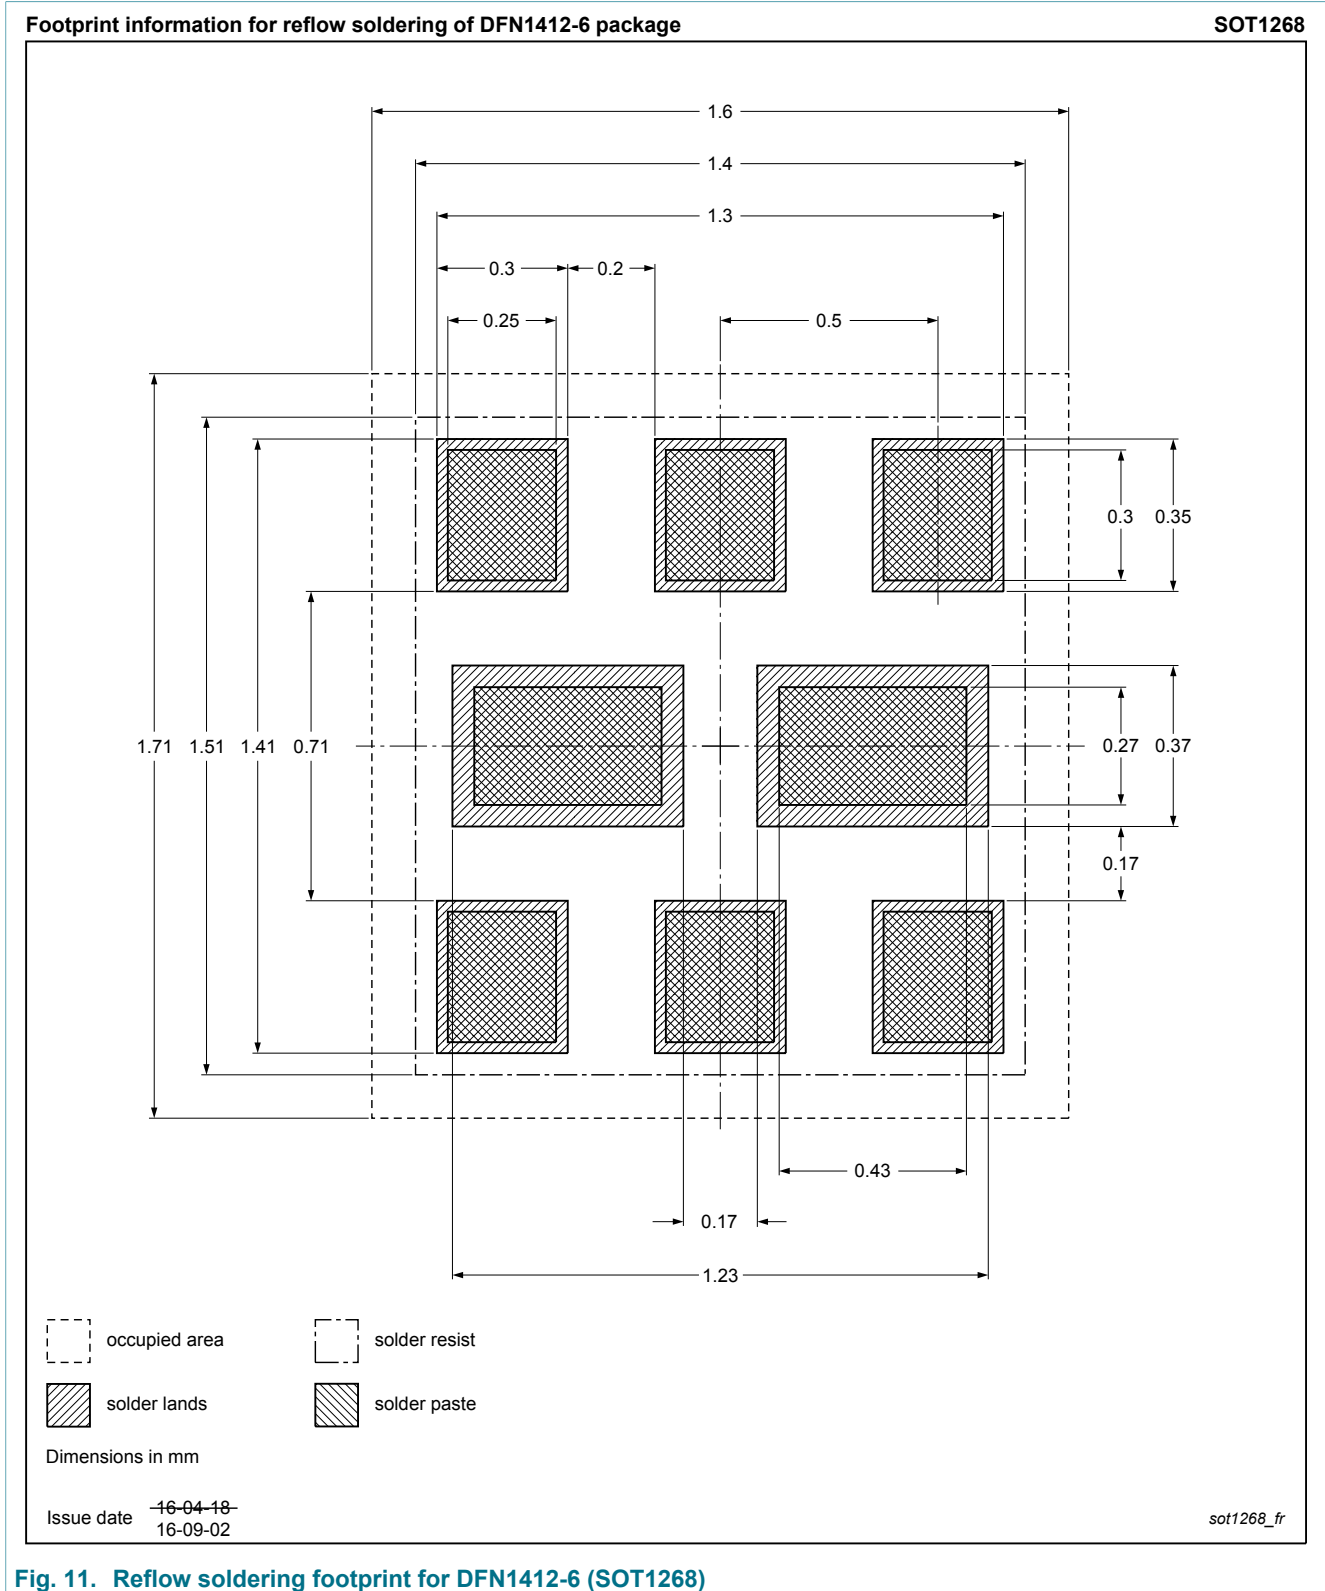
Reflow soldering footprint for DFN1412-6 (SOT1268)
